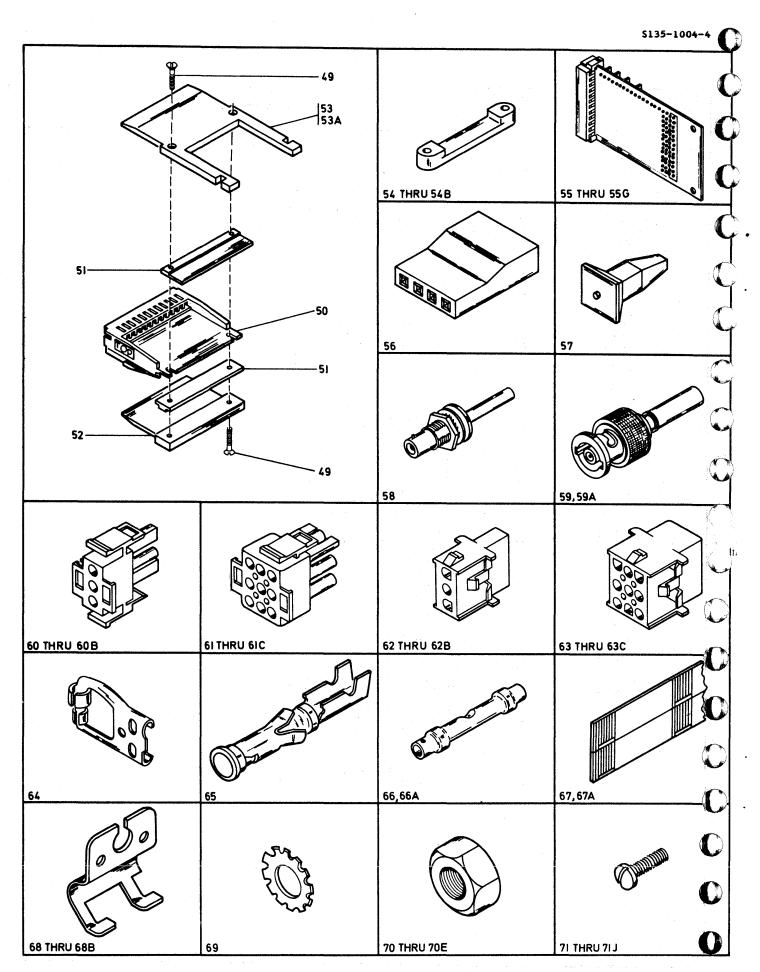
CABLE ASSEMBLIES WITH COMPONENT PARTS (SHEET 3 OF 6, INDEX NO. 49 THRU 71J)
